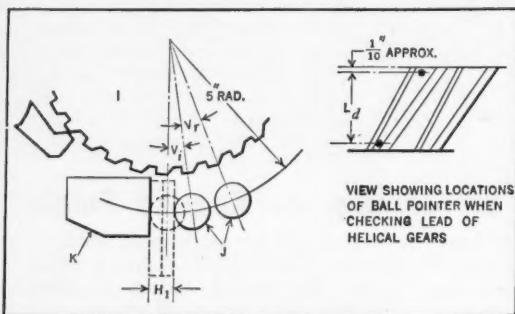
View showing locations of ball pointer when checking lead of helical gears.
